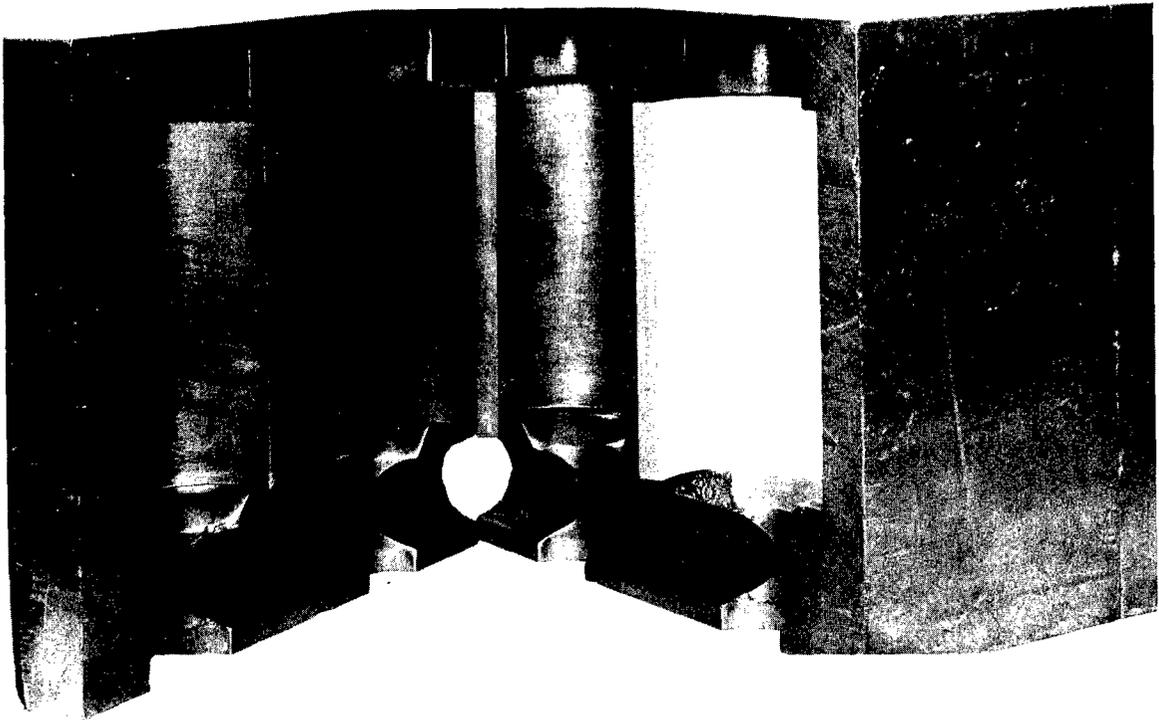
Detail of graphite block mold showing position of experimental inserts and runner for bottom feed of castings
